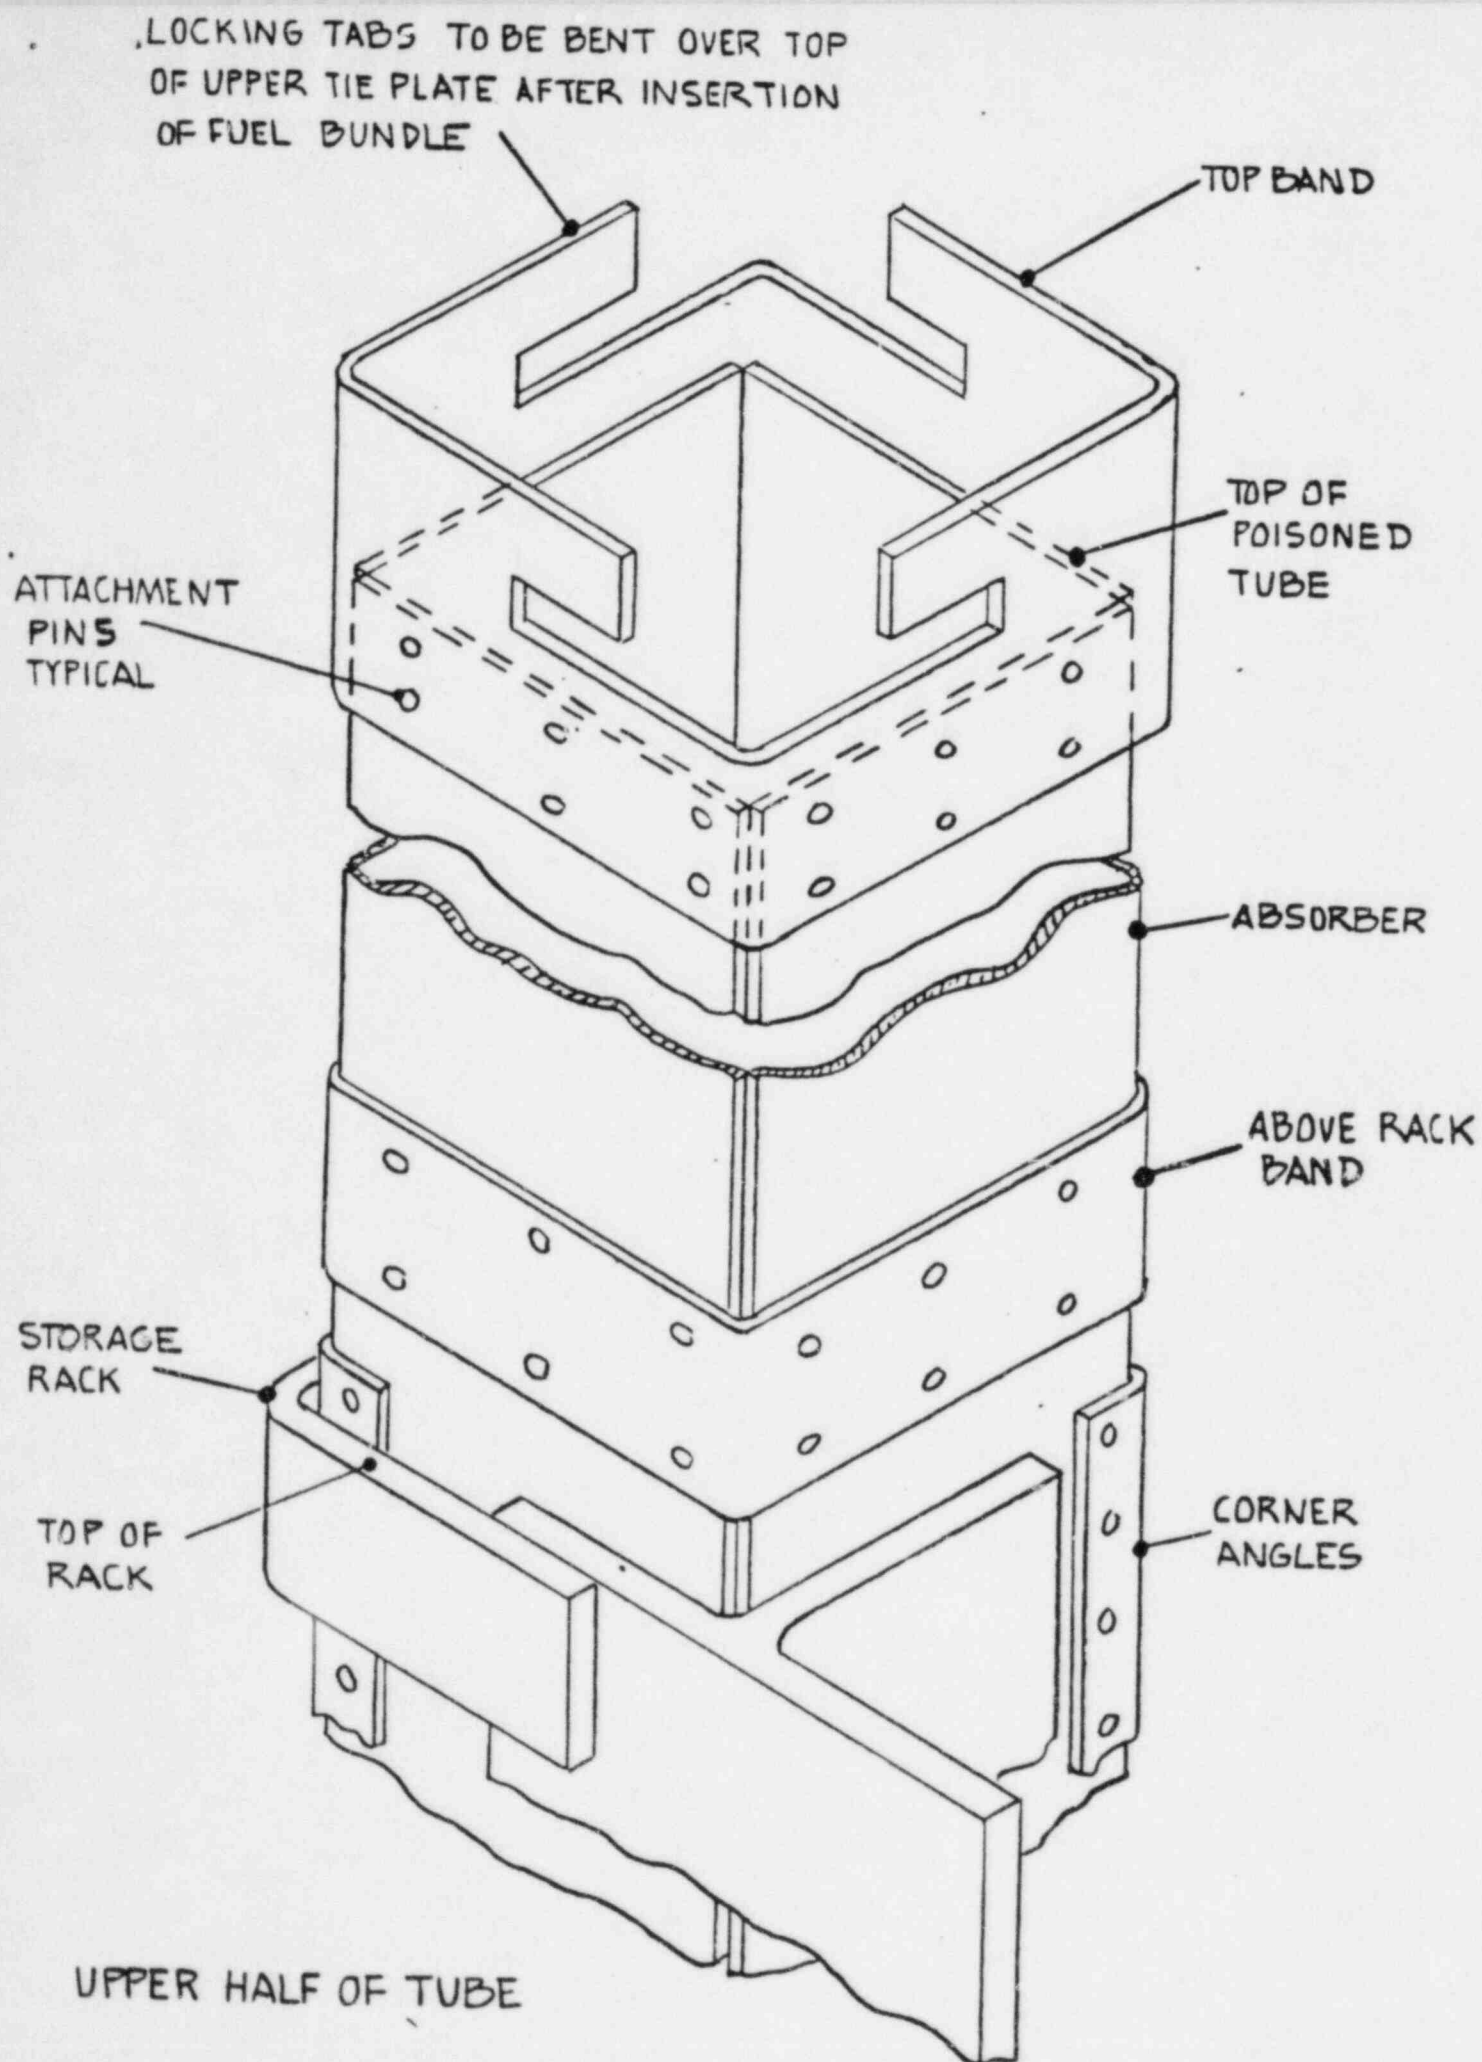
Fuel Assembly Protective Can (Upper View)
